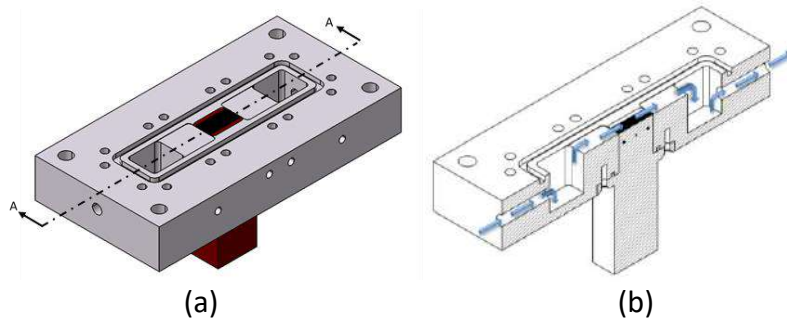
Manifold with aluminium block (a) Isometric view (b) A-A cross-section
